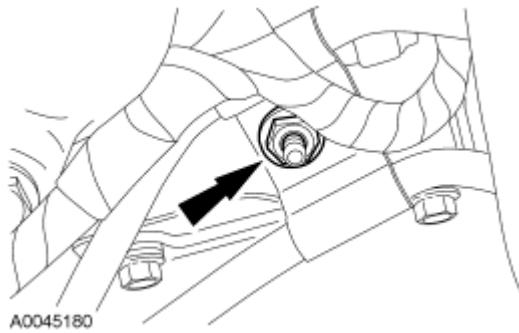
Transmission Cooler Tube Support Bracket Nut
